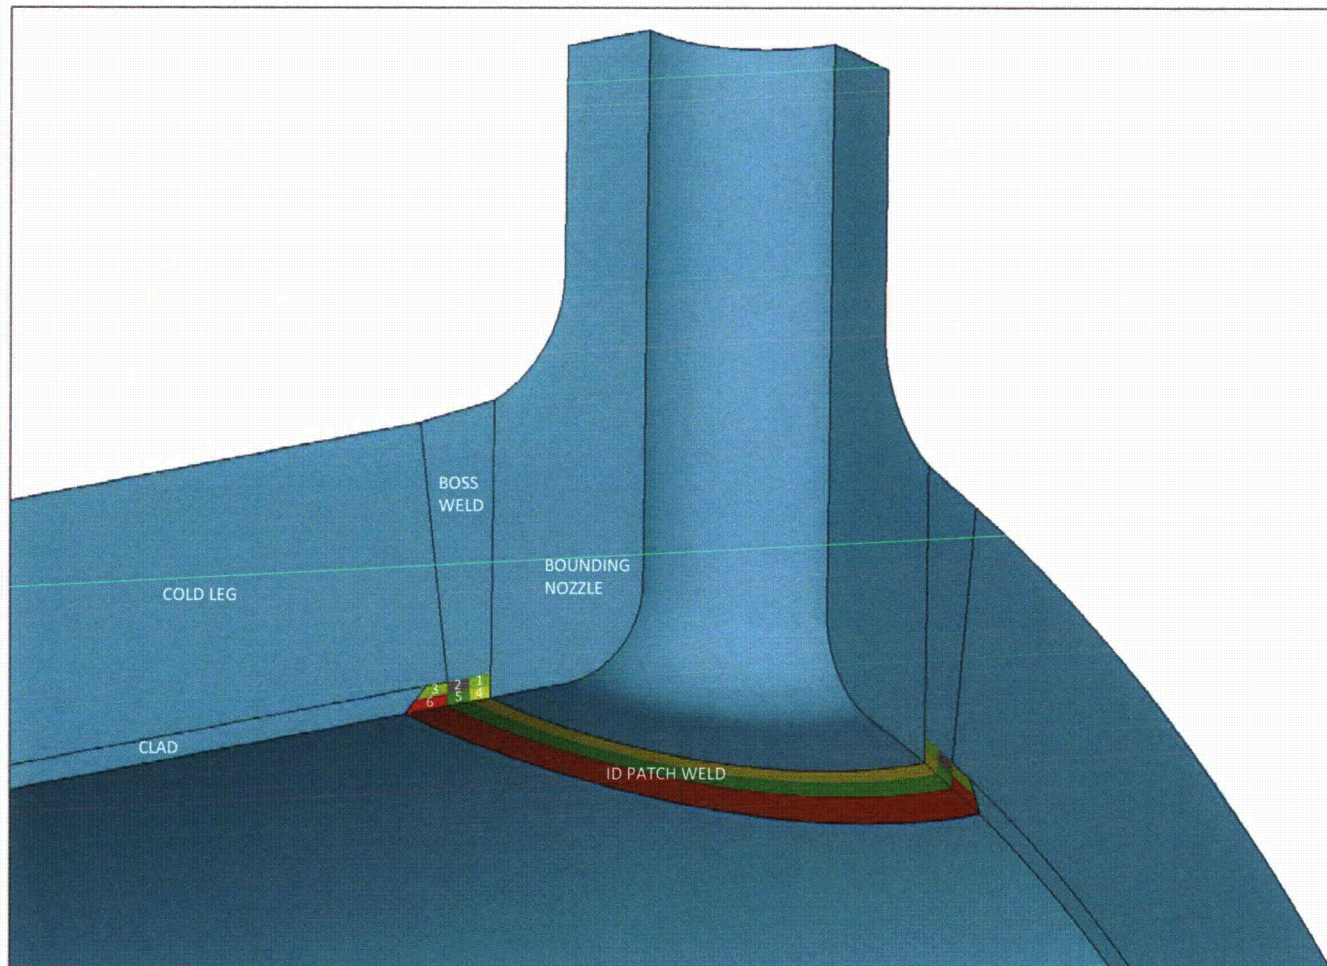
Weld Nugget Definitions for the Bounding Cold Leg Nozzle ID Patch Weld
